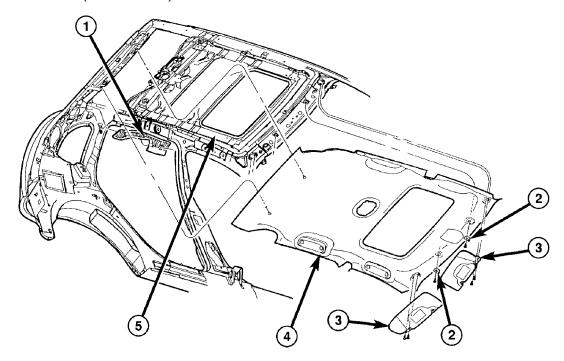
HEADLINER WITH SUN ROOF - TYPICAL
